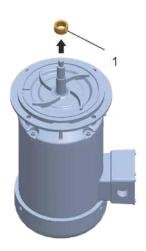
Mechanical seal locking screw (example: herborner.F-N)
